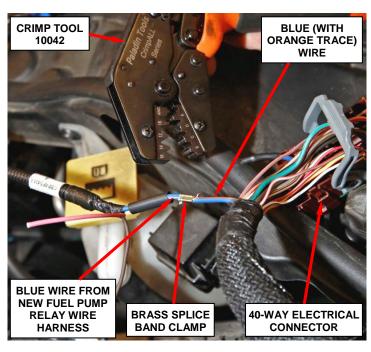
Crimp and Solder Blue Wire to Blue Wire (with Orange Trace)
